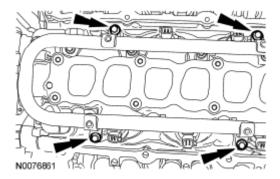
Locating Fuel Rail Bolts Courtesy of FORD MOTOR CO.
